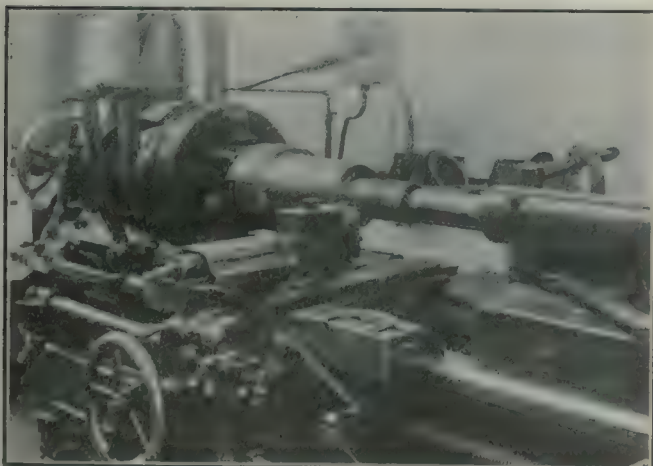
C.M.C. ENGINE LATHE WITH SPECIAL COLLET CHUCK TURNING COPPER BANDS.
